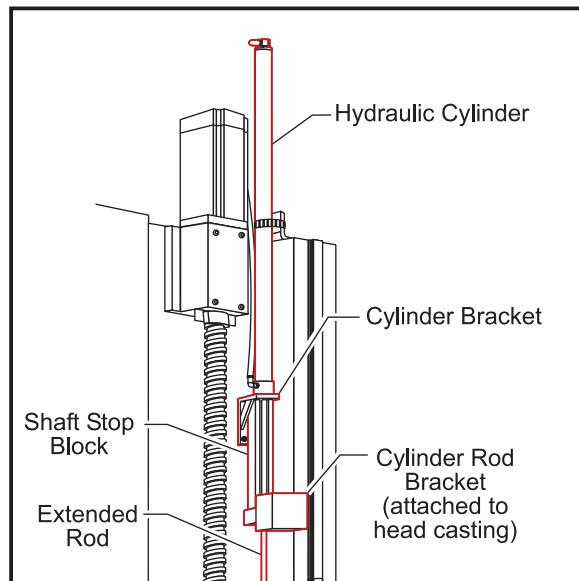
Z-axis motor and components for machines equipped with hydraulic counterbalance.
